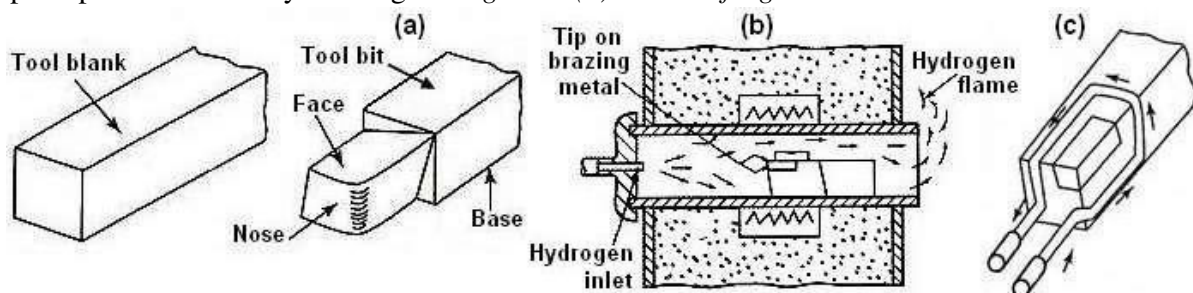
(a) Forged tool (b) Furnace brazing of a tool tip (c) Induction brazing of a tool tip
